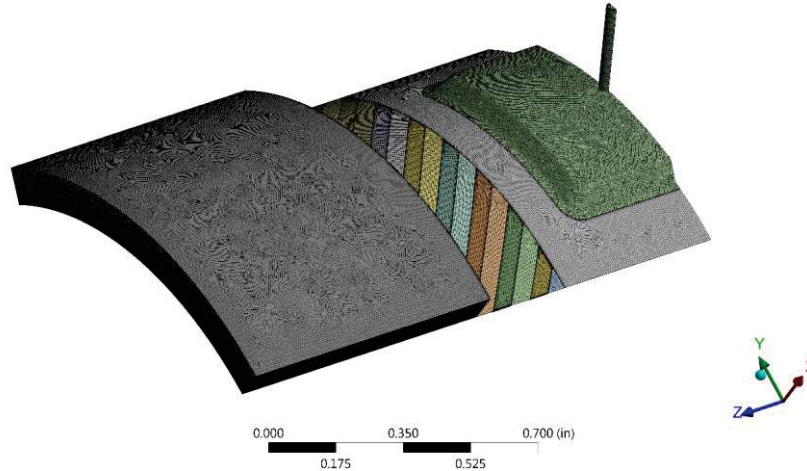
Sector Model Used to Evaluate Different Groove Geometries to Reduce Bearing Leakage
